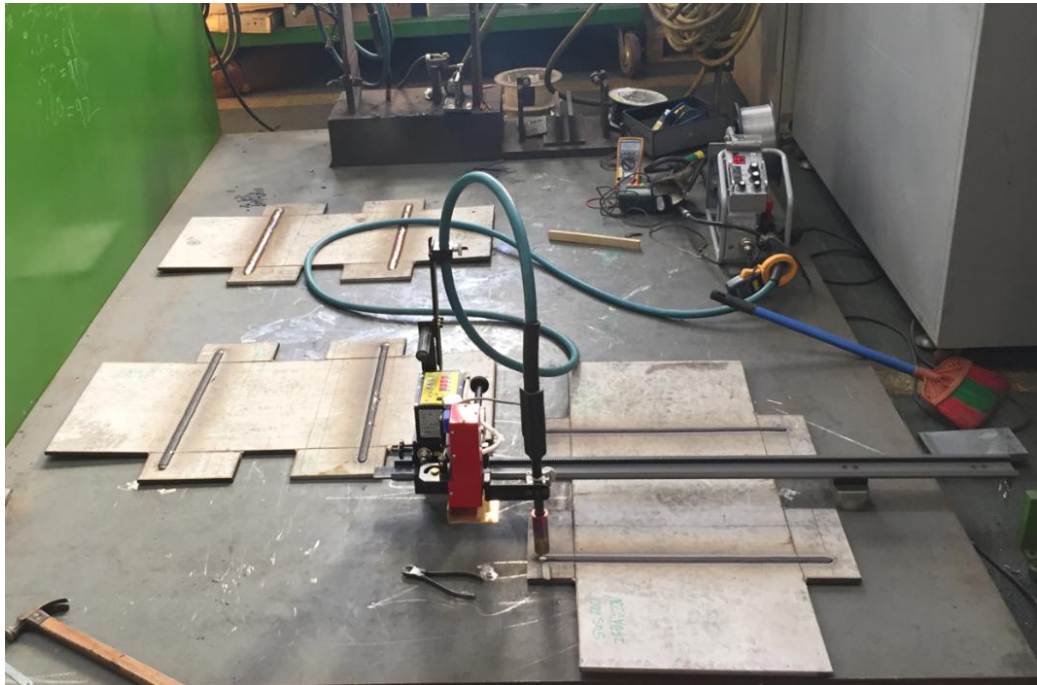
Bead-on plate welding experiment for SUS316L
